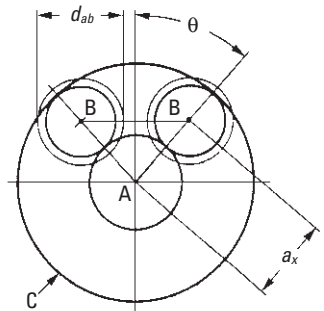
(c) Condition No. 3 of Planetary Gear System
